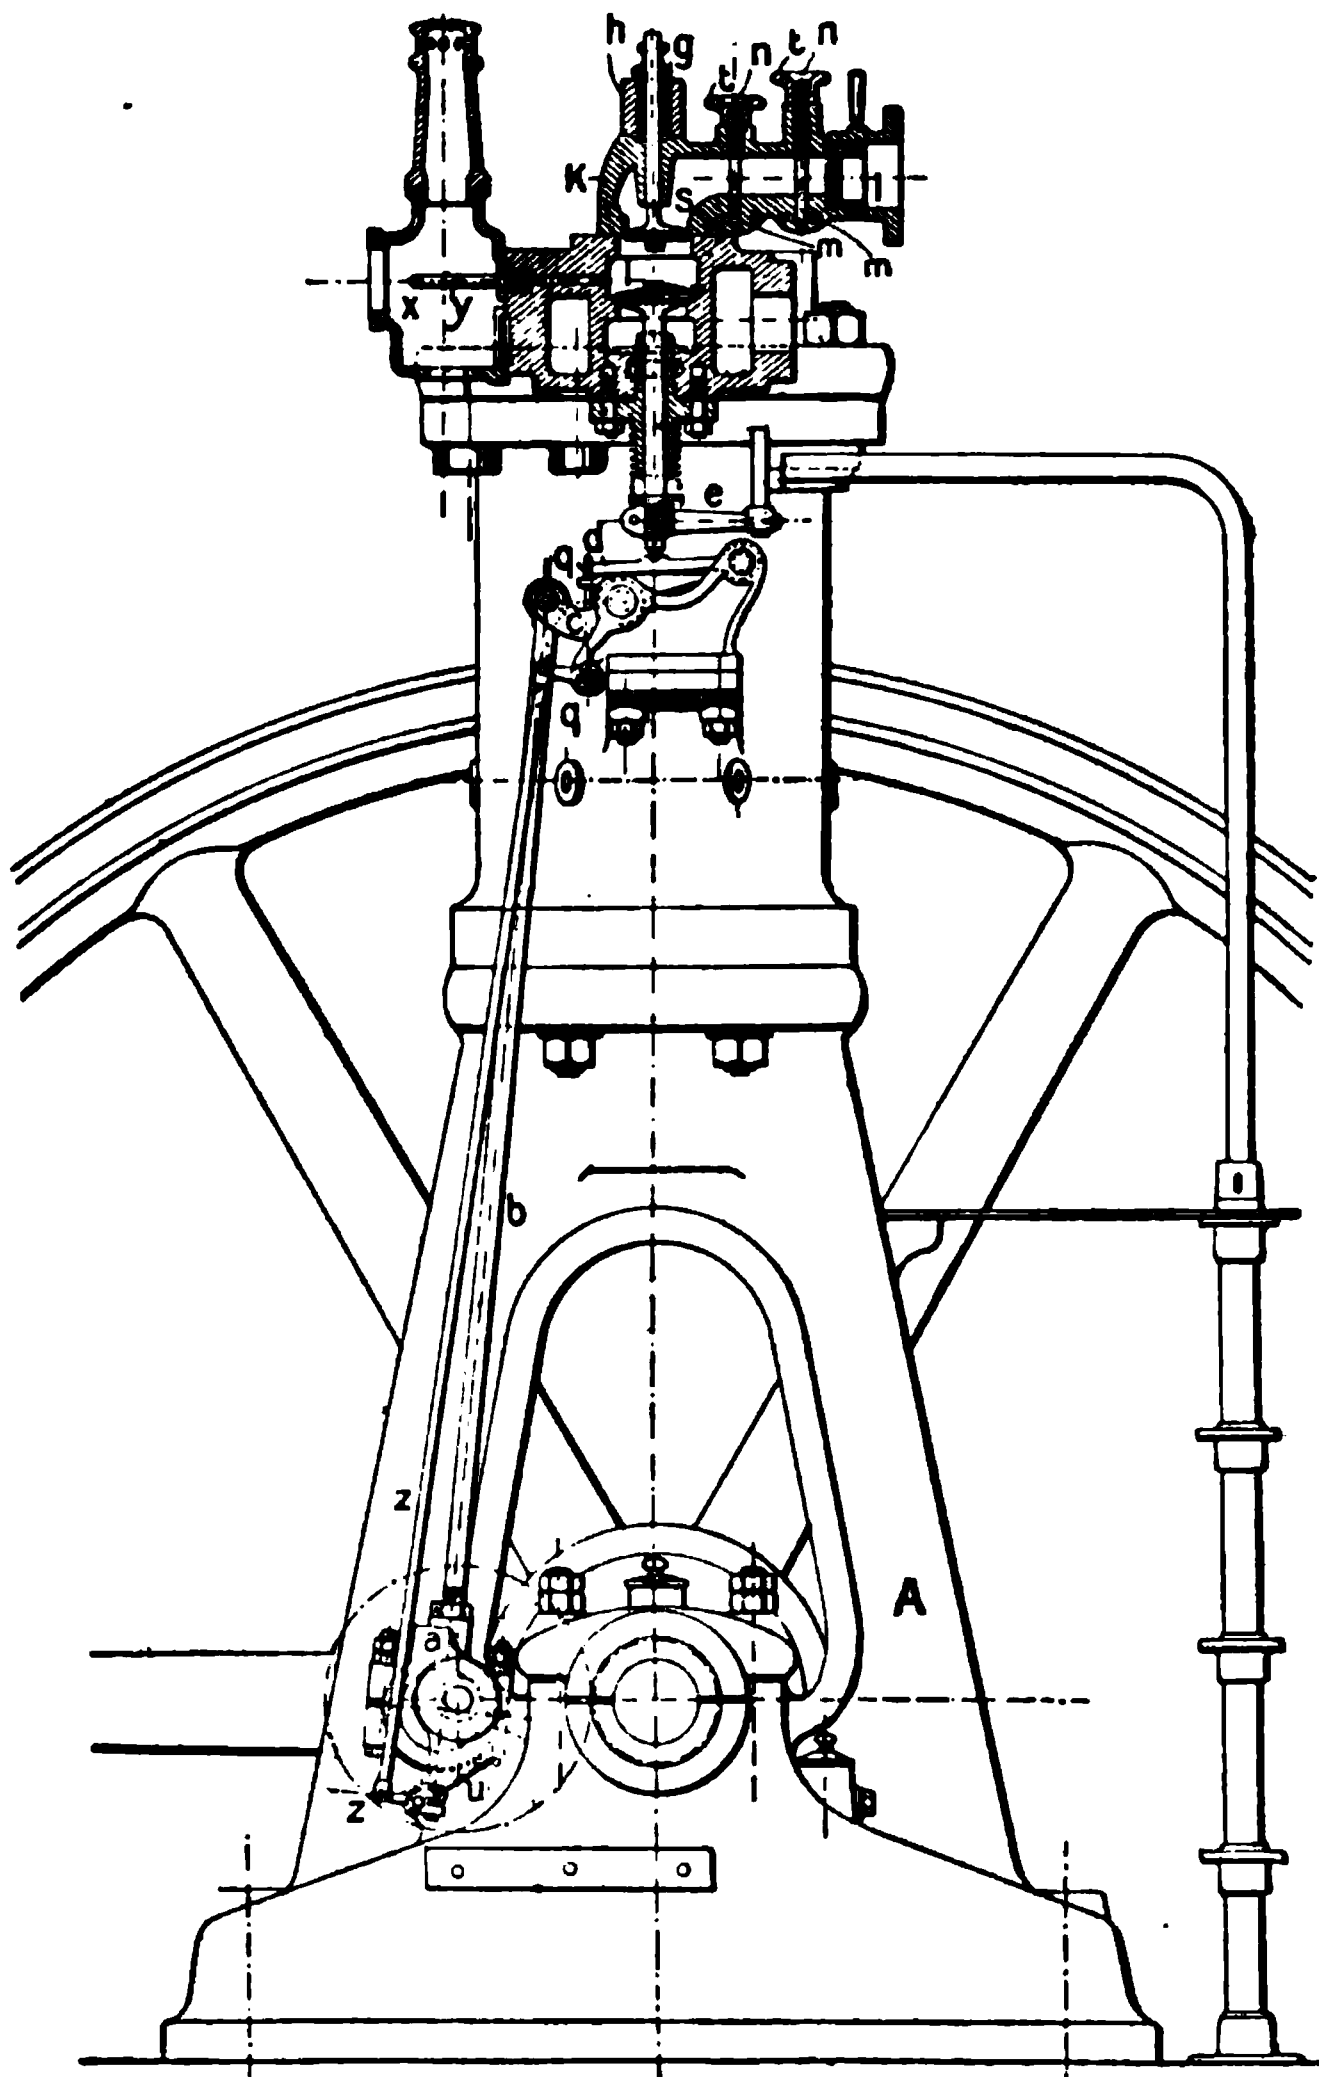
Bánki Oil Engine—Sectional Elevation.
